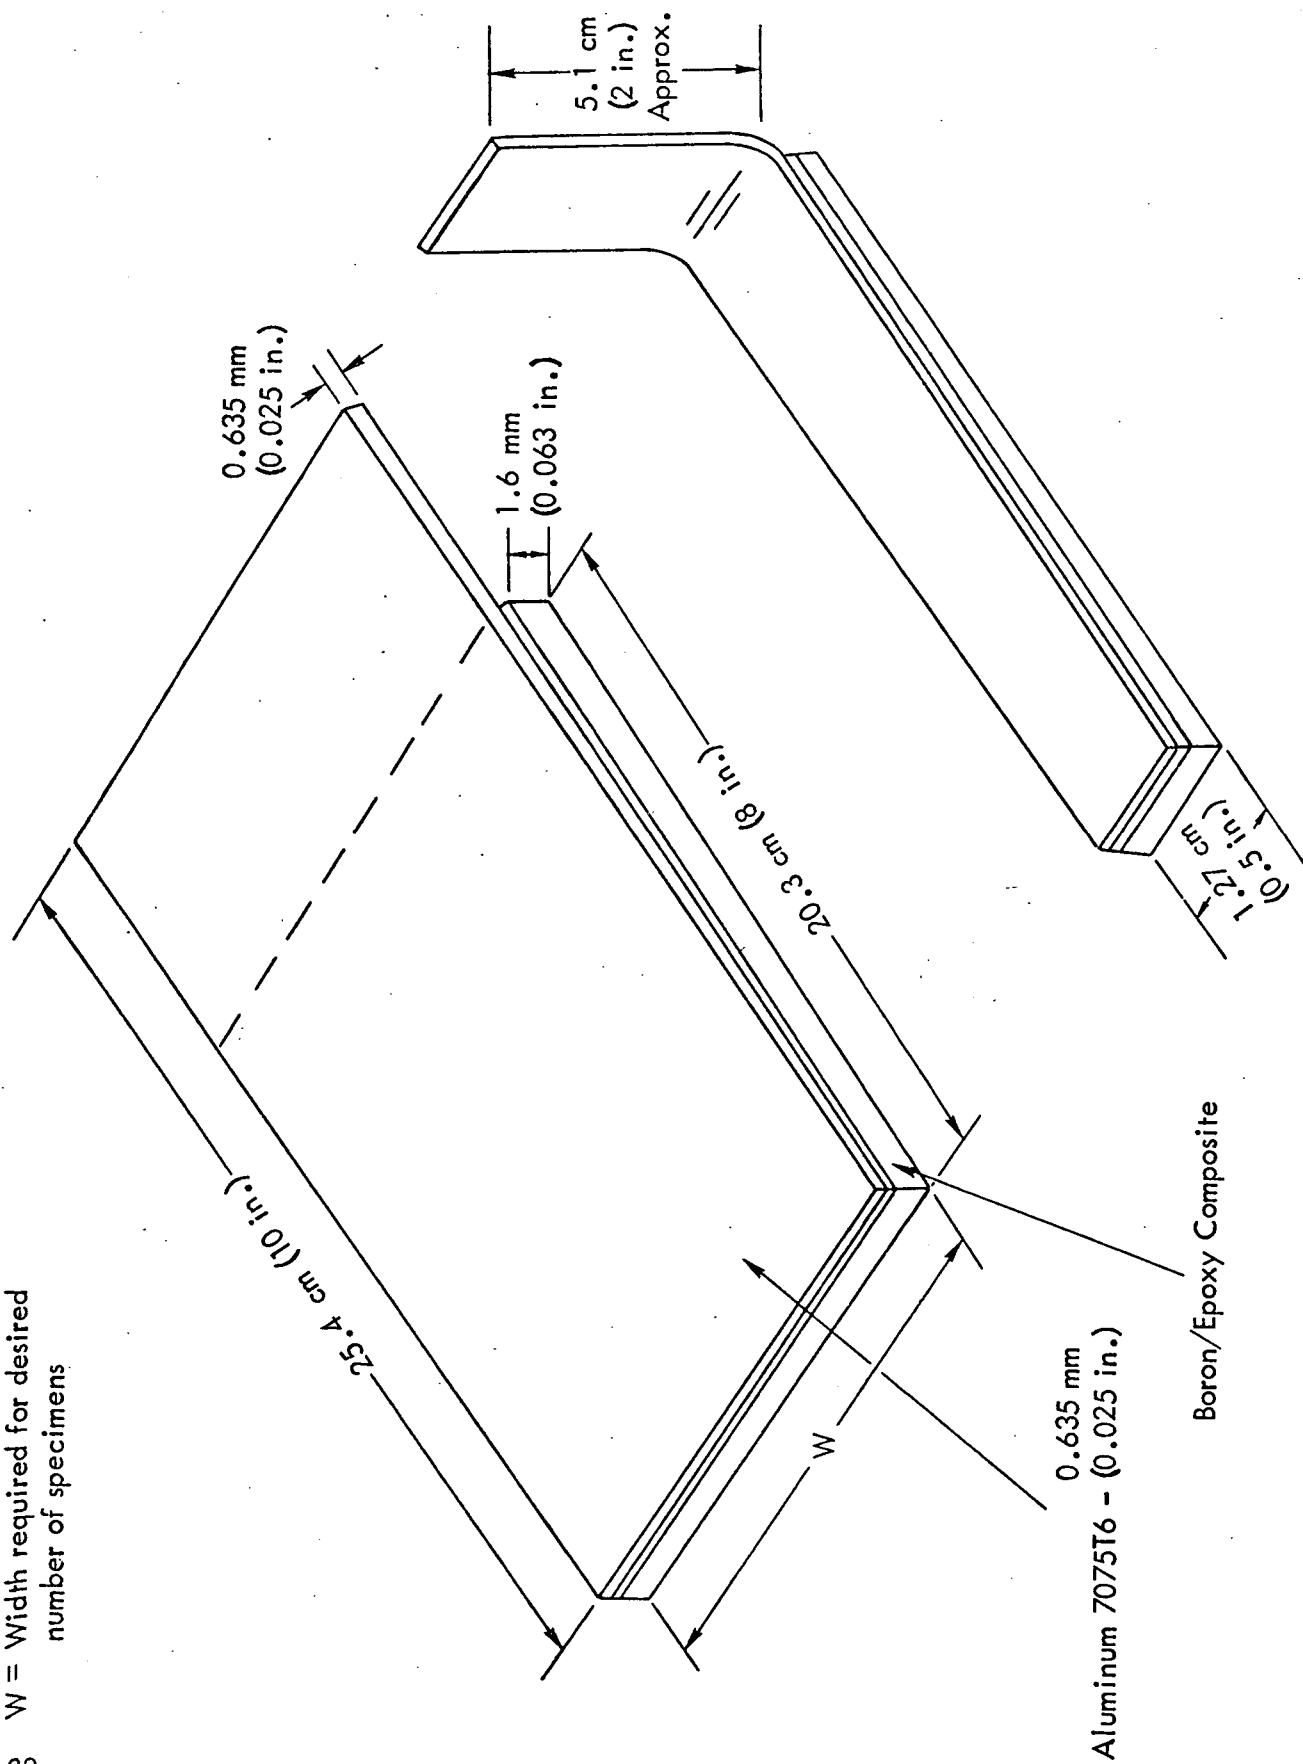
PEEL TEST PANEL AND TEST SPECIMEN
